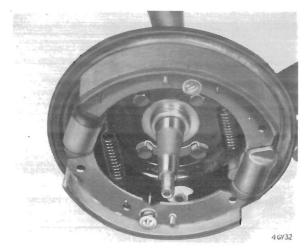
Locking tabs securing backing plate and steering arm bolts
